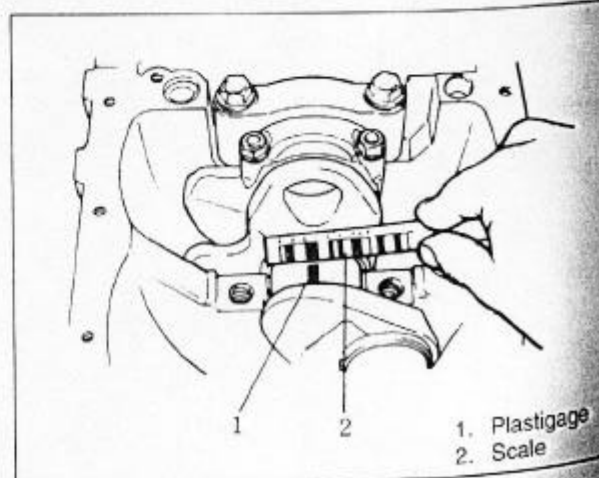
A — 105 MEASURING THE OIL CLEARANCE BETWEEN THE MAIN BEARING
